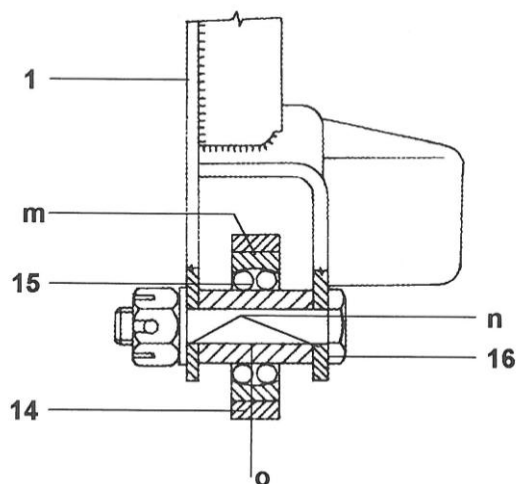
Dimensions, allowances and play in control stick fitting
